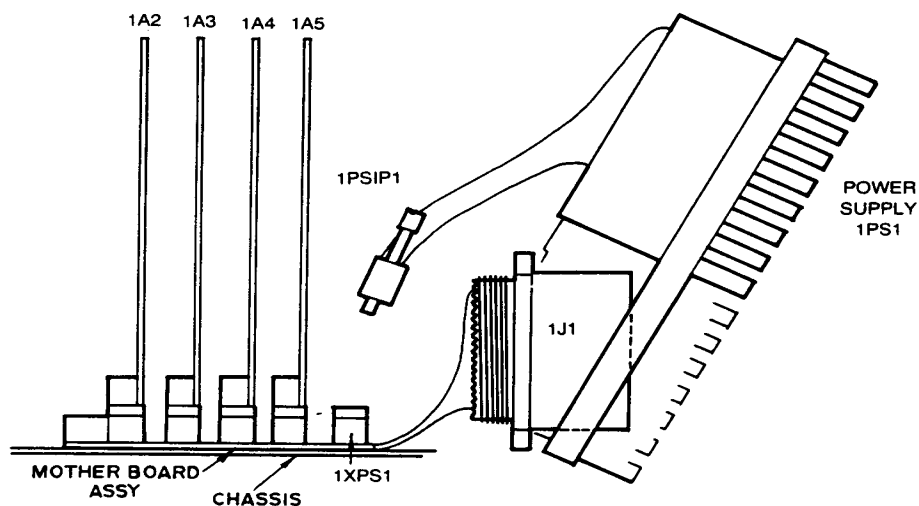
Installing Power Supply 1PS1 in Chassis
